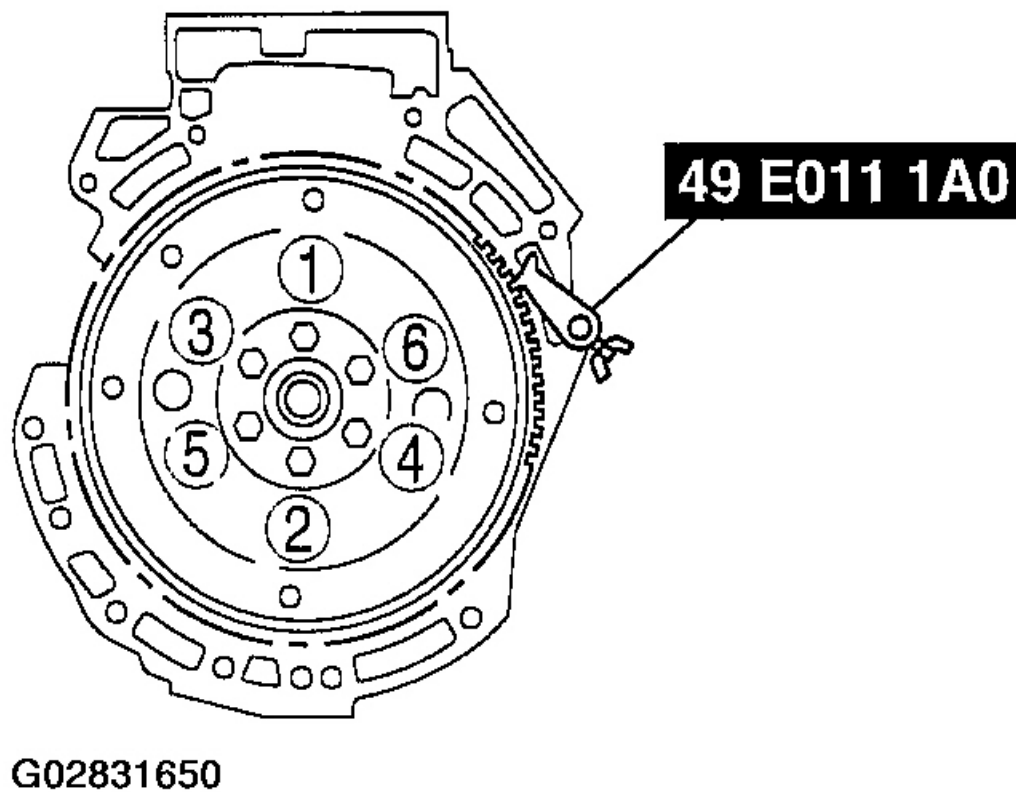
Drive Plate/Flywheel Bolt Tightening Sequence
